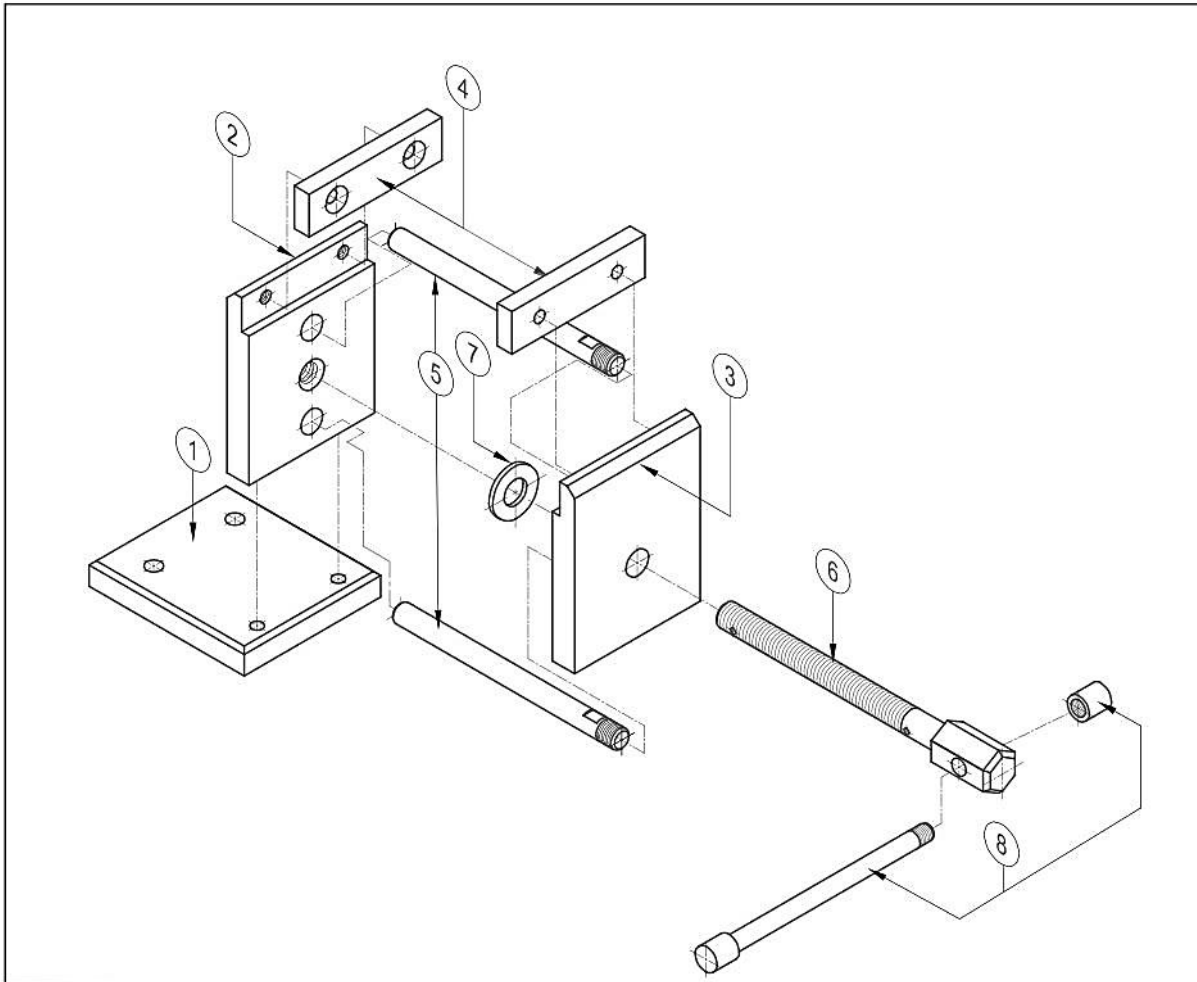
EXPLODED ISOMETRIC DRAWING
